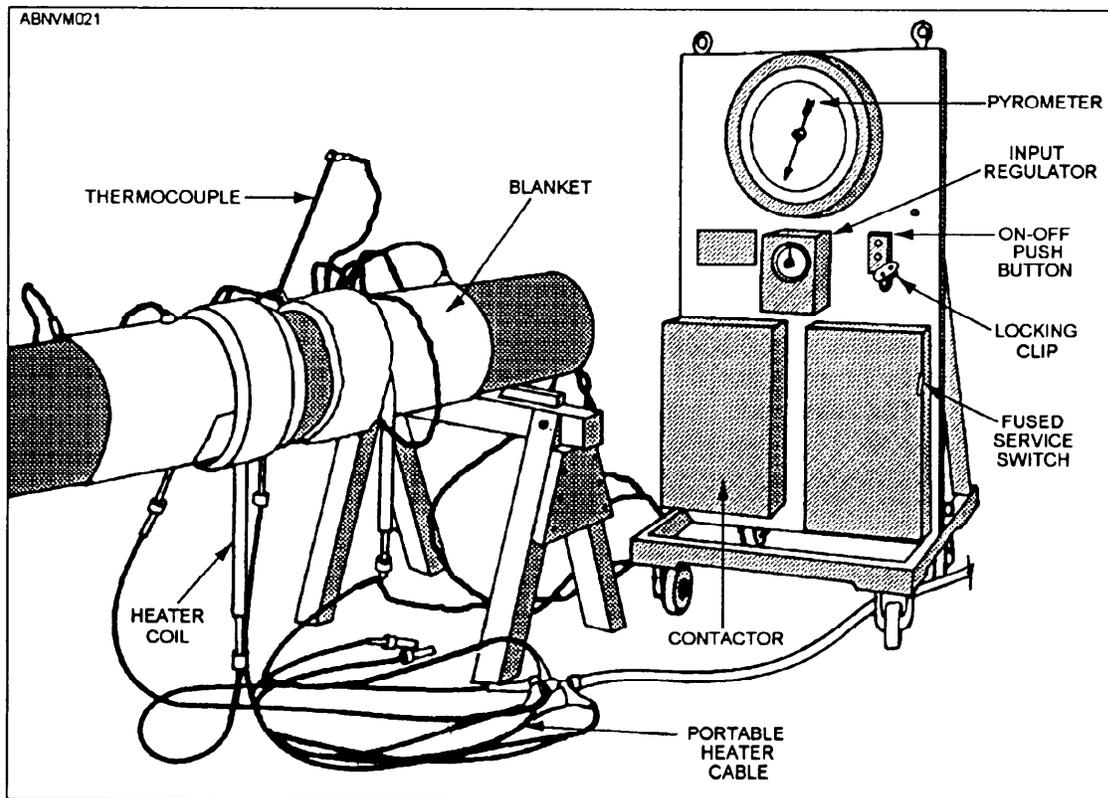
Postheating welded pipe with electric induction coil equipment.
